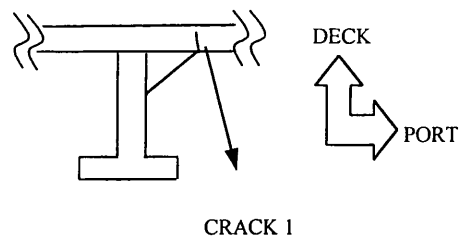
Most probable crack at the deck plate/longitudinal stiffener connection
